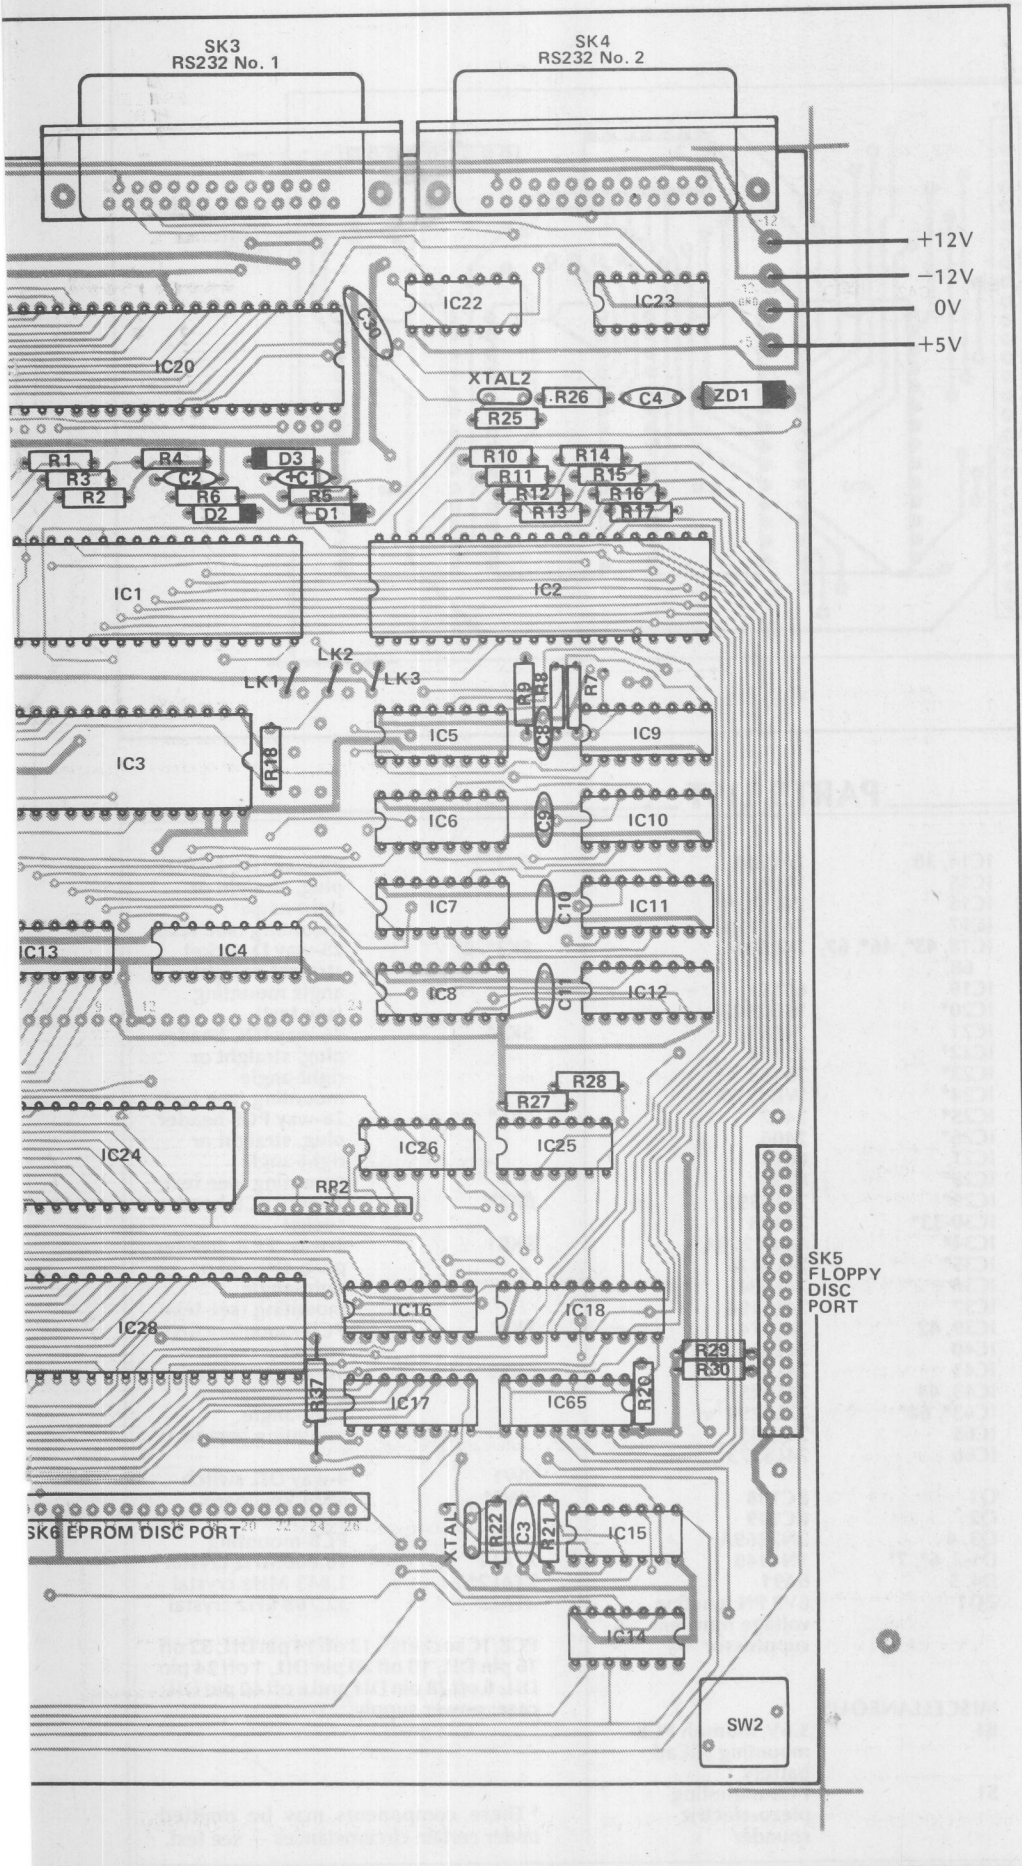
Component overlay for the main printed circuit board. The board is double-sided but for reasons of clarity the top foil only is shown here.
